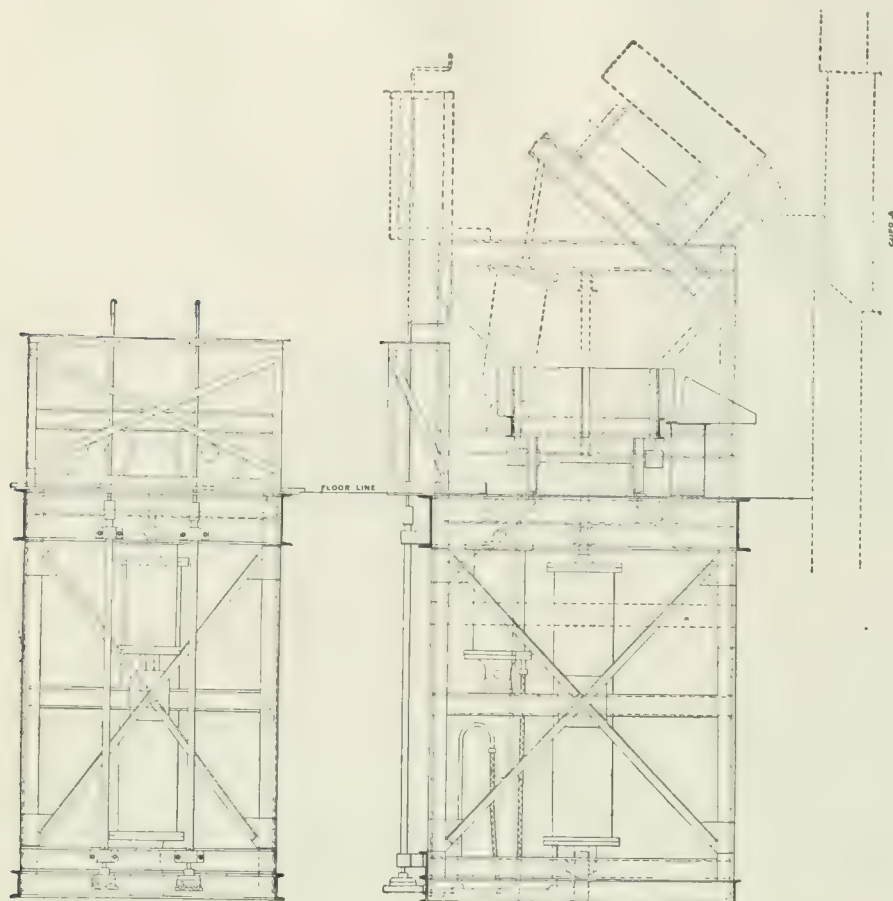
Details of the Compound Pneumatic Charging Machine.
